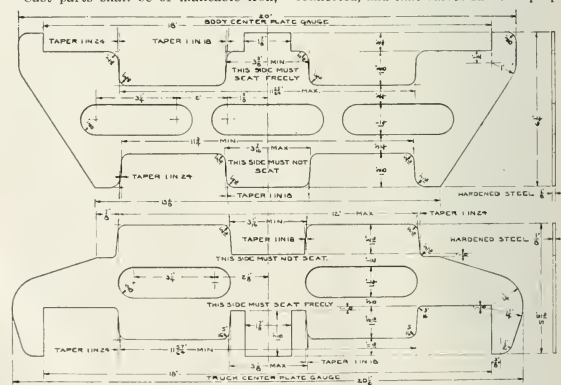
Recommended Center Plate Tolerance Gauge.
